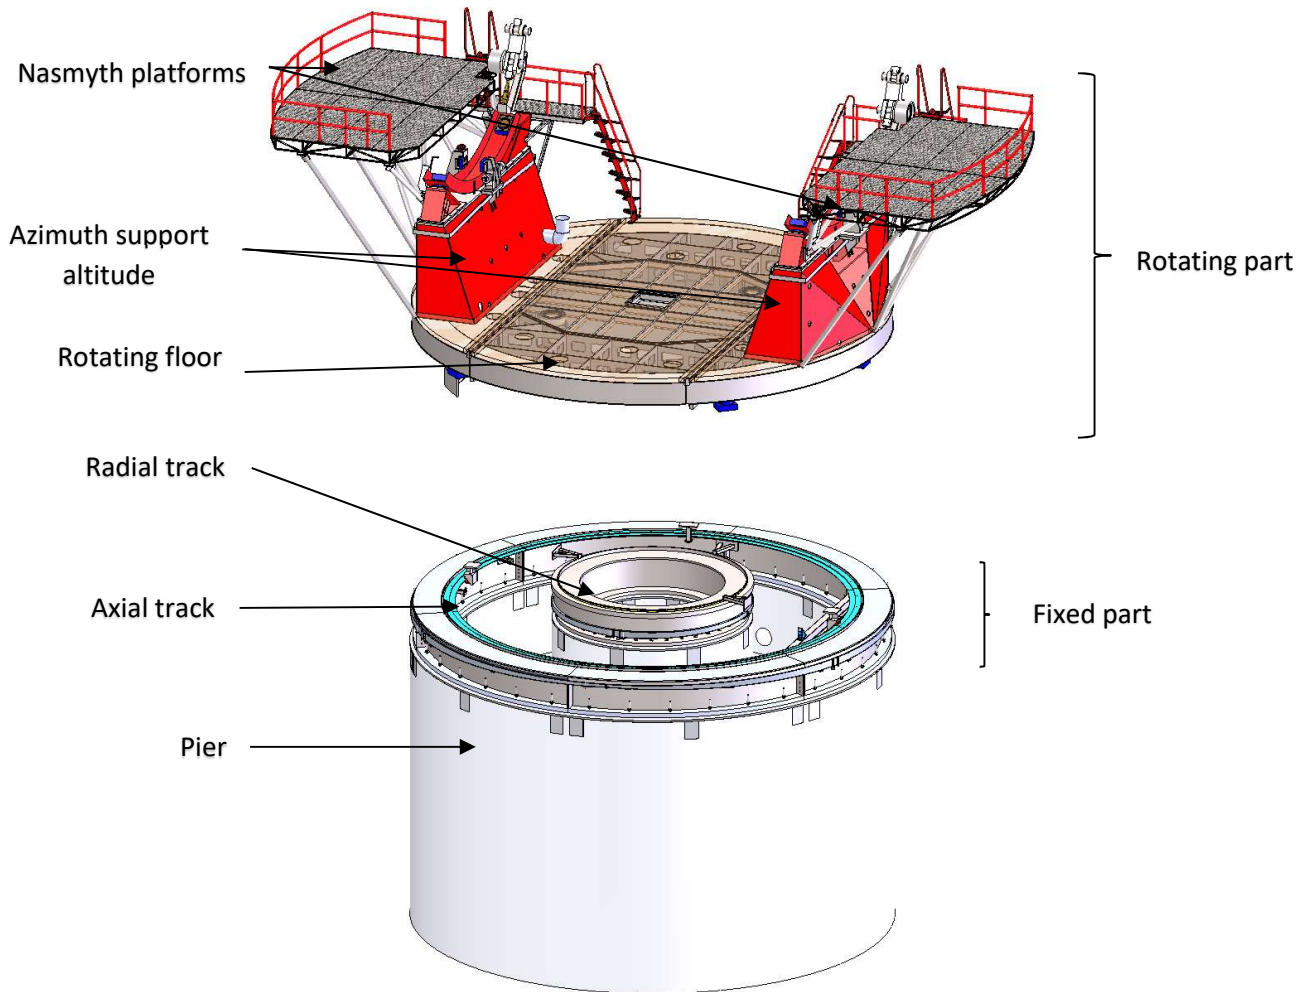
TSPM-TL-AZ Components of Azimuth assembly.
